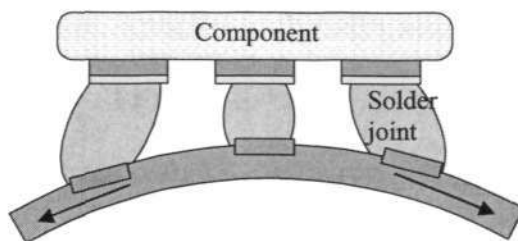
Solder joints subjected to tensile loading due to substrate flexing (bending) during handling of the assembly
